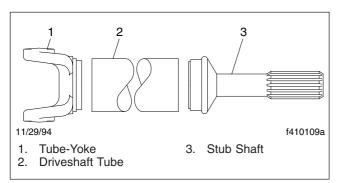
, Driveshaft Tube, Stub Shaft, and Tube-Yoke
